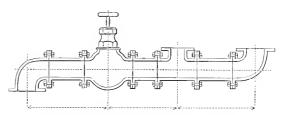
DIAGRAM SHOWING FLANGED JOINTS.
